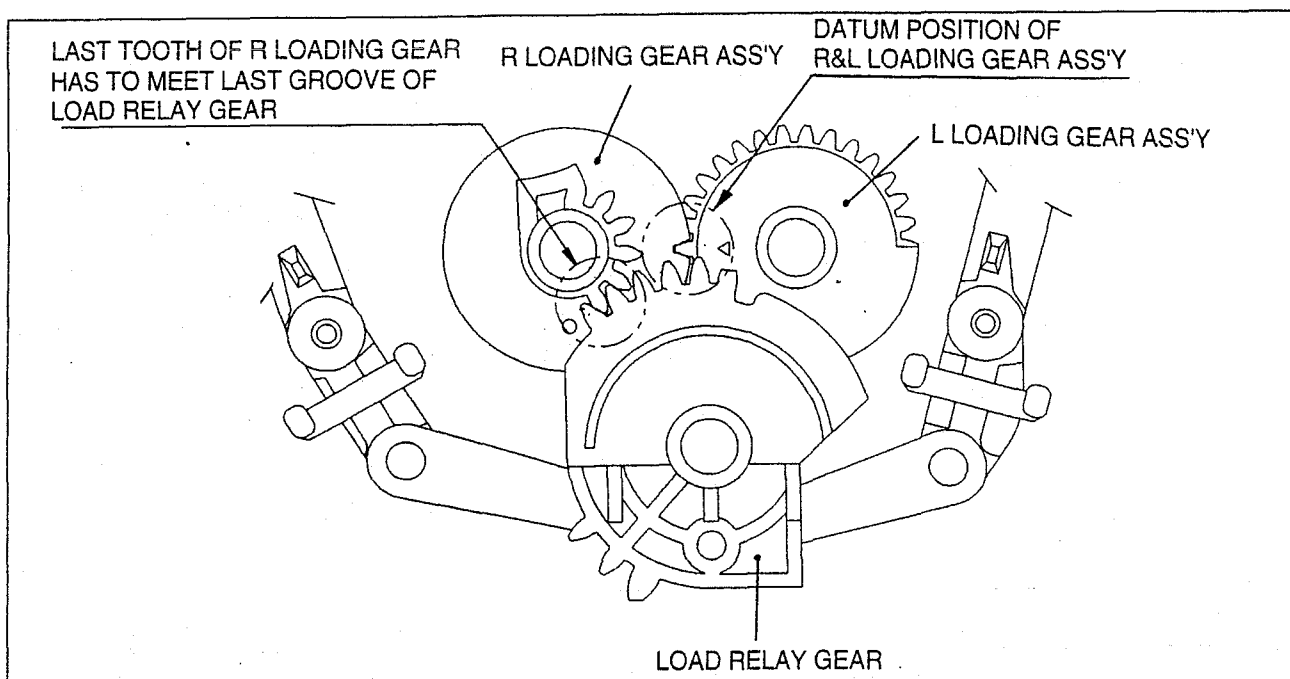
DATUM POSITION OF LOADING GEAR ASS'Y & LOAD RELAY GEAR
